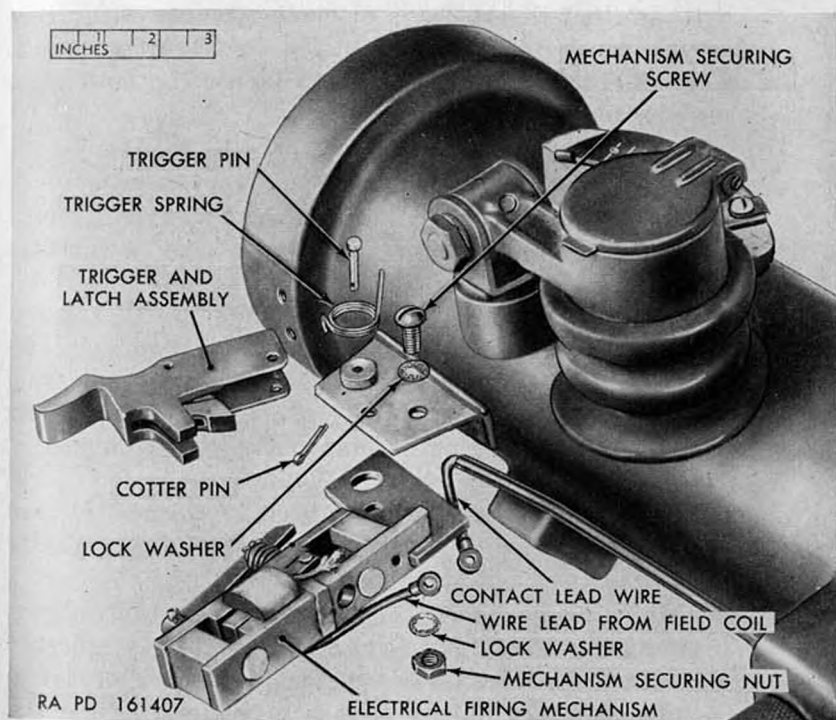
Electrical firing mechanism 7140325 (removed from barrel).
